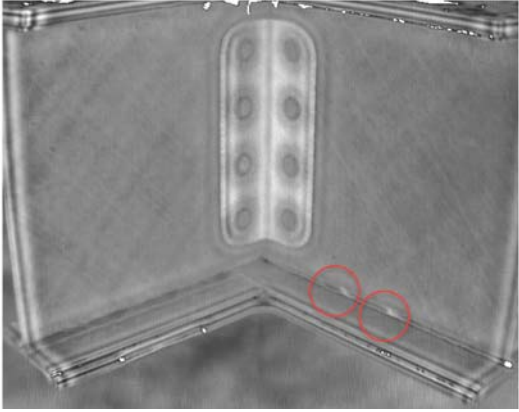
Thermal inspection results for cruciform 1, rivet 1 bottom.
